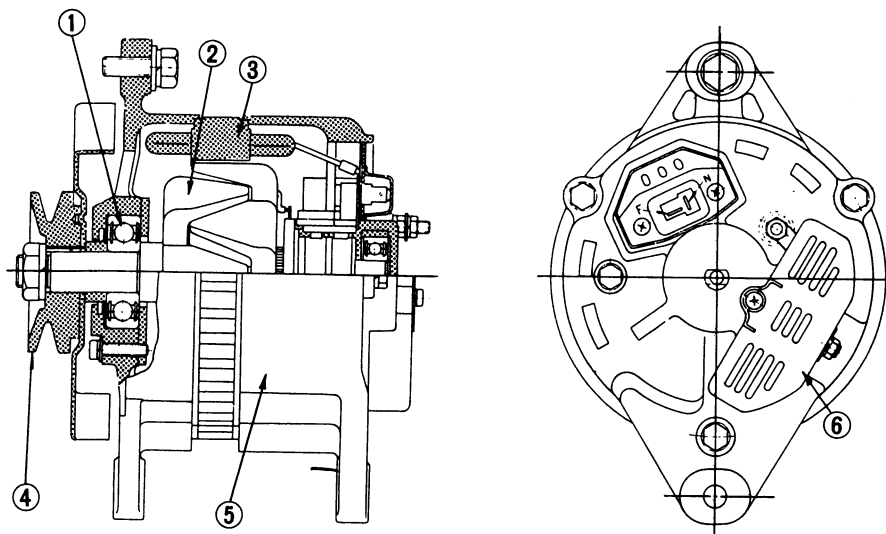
Exploded view of LT150-05B (LT135-13B)
